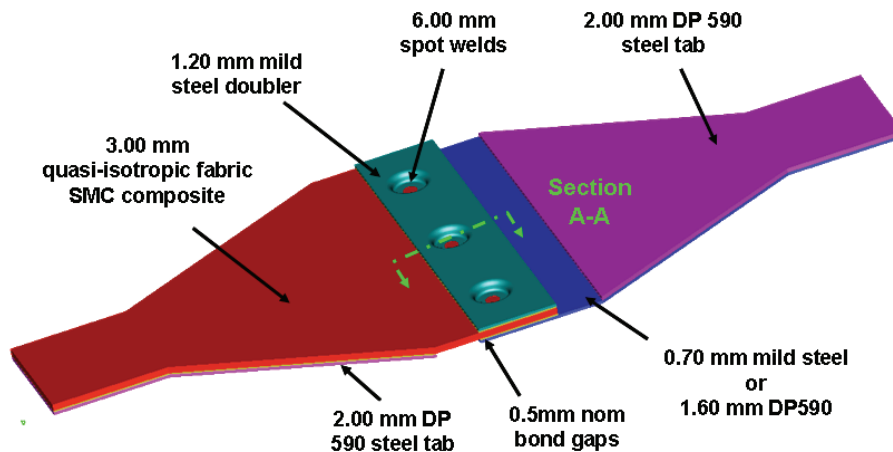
Super lap shear test weld bonded coupon developed by General Motors. (Image is courtesy of Multimatic Incorporated.)
